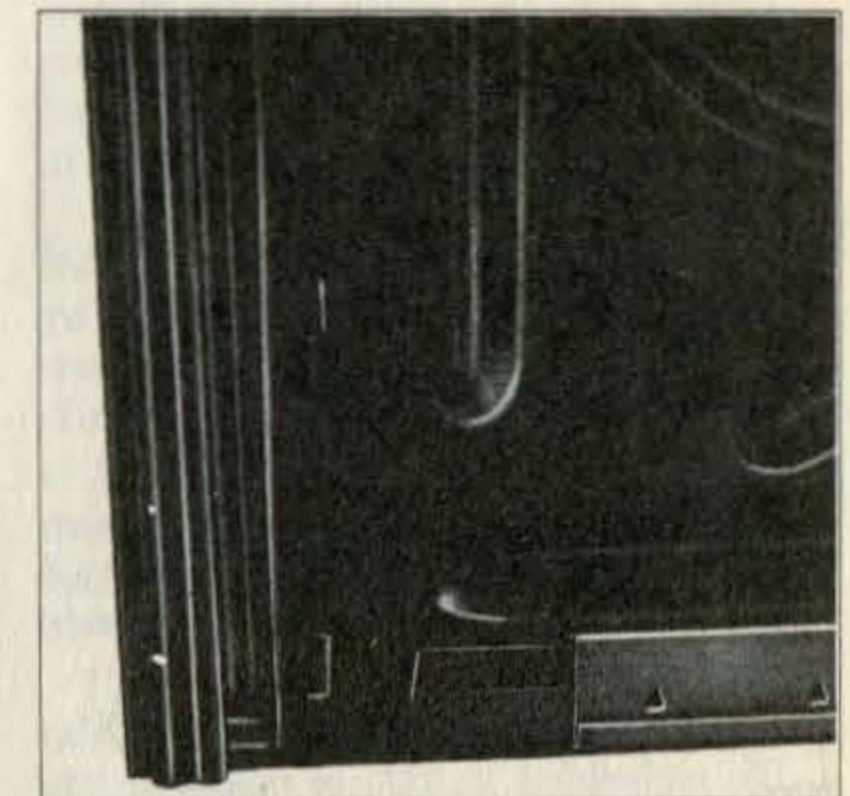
Attachment of Lower Edge of Door Trim Panel
